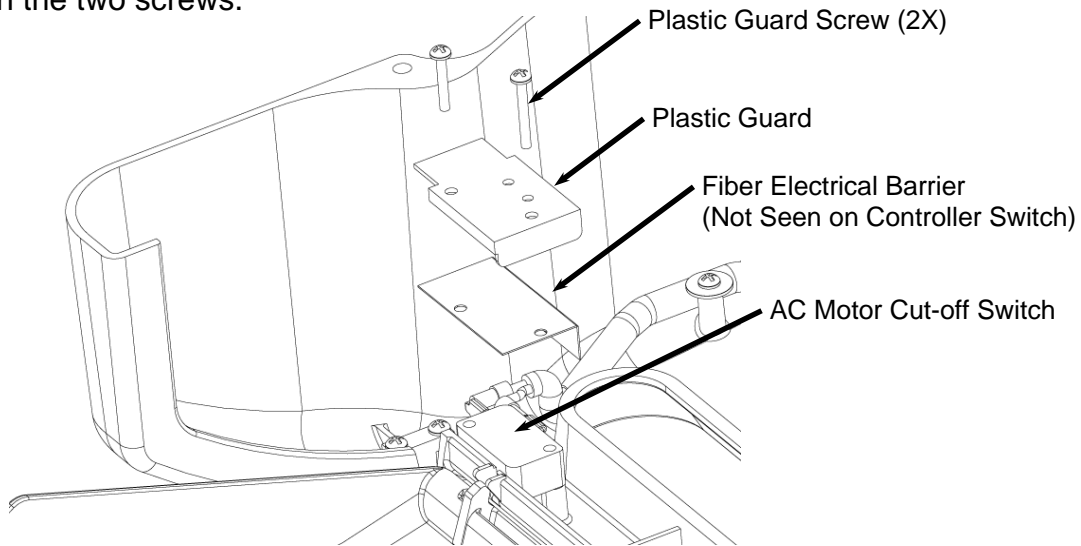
VIEW OF THE AC MOTOR CUT-OFF SWITCH REMOVAL
